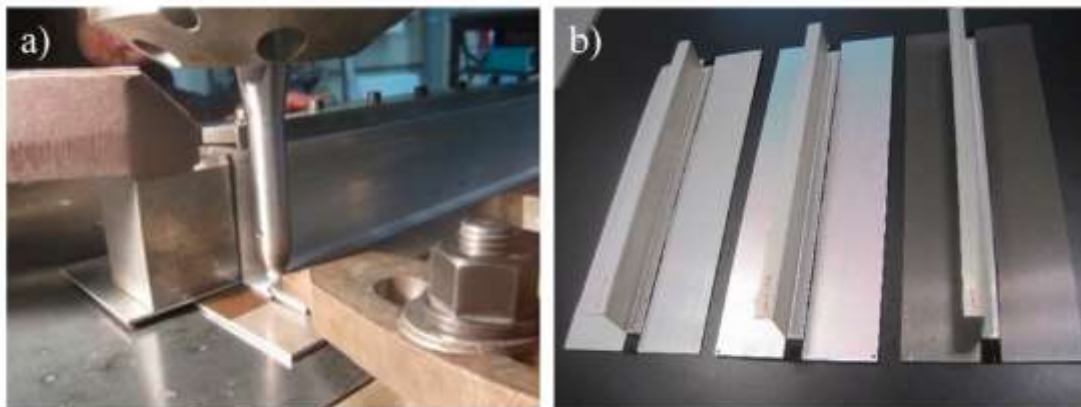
(a) Setup for the FSW process manufacturing; and (b) Examples of FSLW joint-coupons produced using base materials with different surface conditions and sealant.
